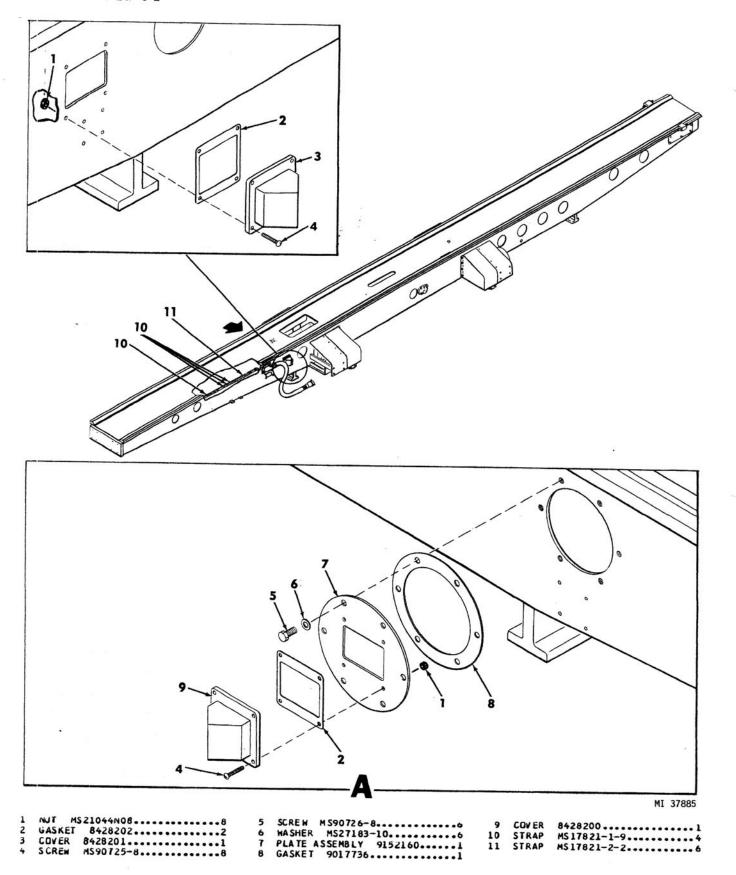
ELECTRICAL INSTALLATION, LAUNCHING RAIL /8167172/
